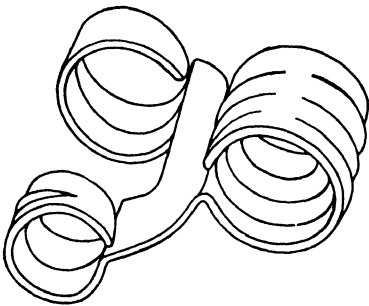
Another sample of the numerous machine-gun-belt links produced, one at each press stroke, complete and to precision limits from flat strip materials.
